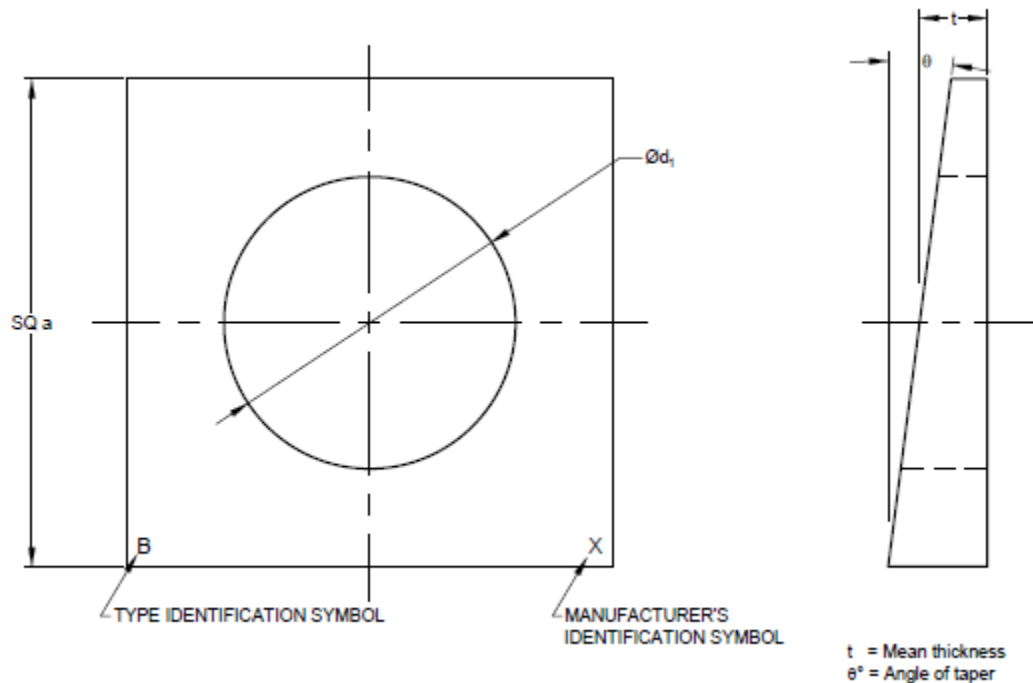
SQUARE TAPER WASHERS (TYPE B AND C)
